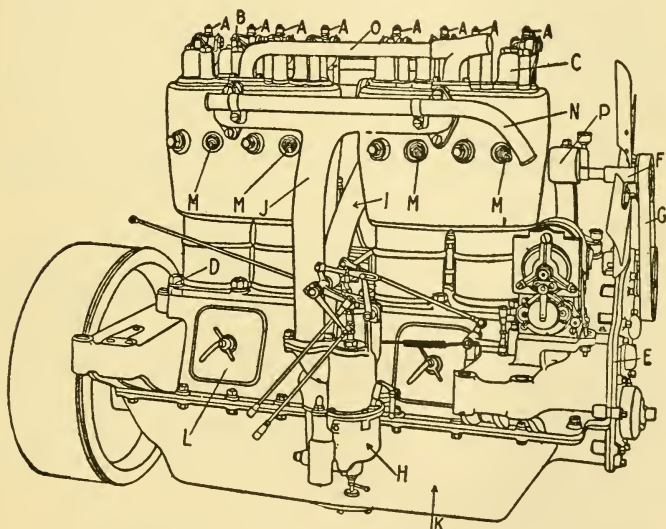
Pope-Hartford engine. A, valve operating lever grease cups; B, valve operating lever; C, valve cage cover; D, cylinder hold down nut; E, timing gear case cover; F, cooling fan; G, cooling fan belt; H, carburettor; I, carburettor hot air pipe; J, gasoline inlet upper pipe; K, engine crank case cover; L, engine crank case hand hole cover; M, spark plug; N, ignition wire tube; O, water return pipe; P, fan bracket.
